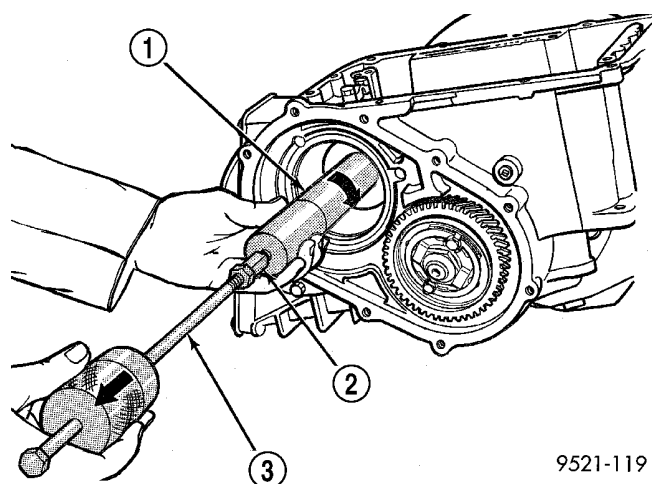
Remove Transfer Shaft and Bearing Retainer Assembly
